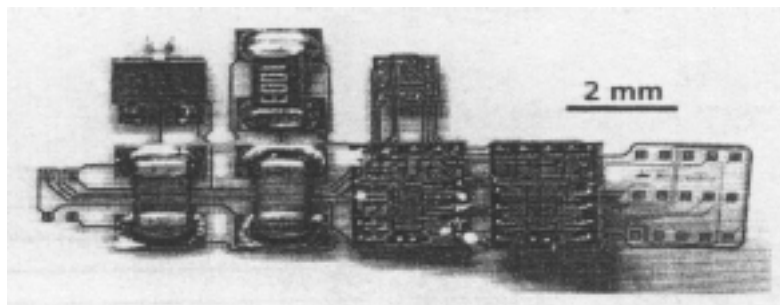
9. Stacked package with glass-epoxy frames (redrawn referring to [1.17])
